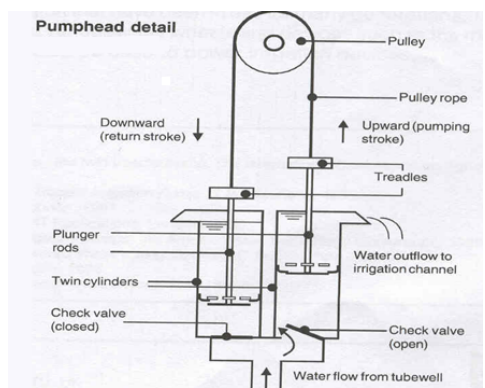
Operation and Parts of treadle pump Figure 5 Layout and Parts of Treadle pump
